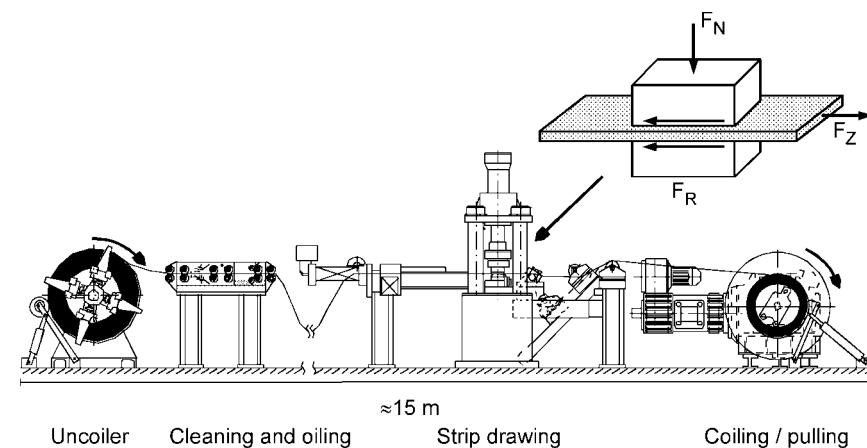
Strip-drawing tester and tools [15.5, 15.6].
